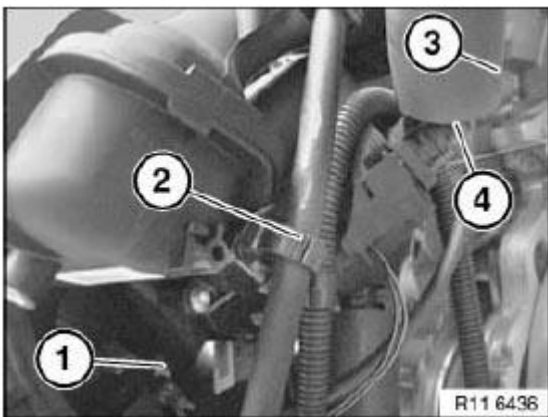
Crankcase Breathers, Plug Connection And Holder
